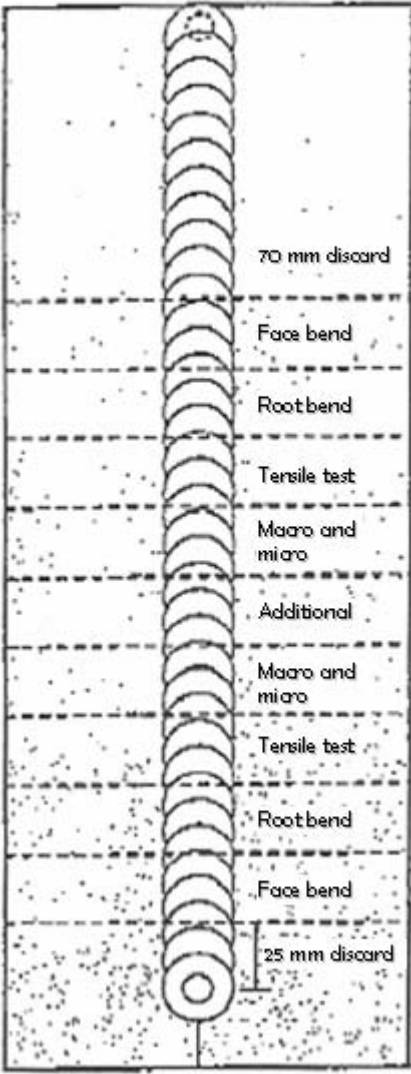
Locations of test coupons for qualification of welding procedures for LR's Guidelines for Approval of FS welds. Courtesy of Lloyd's Register [11].
